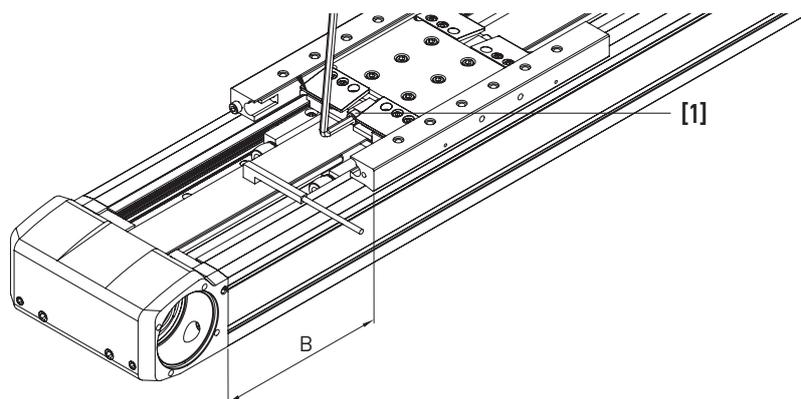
Preloading the toothed belt: linear tables HT-B with cover strip
